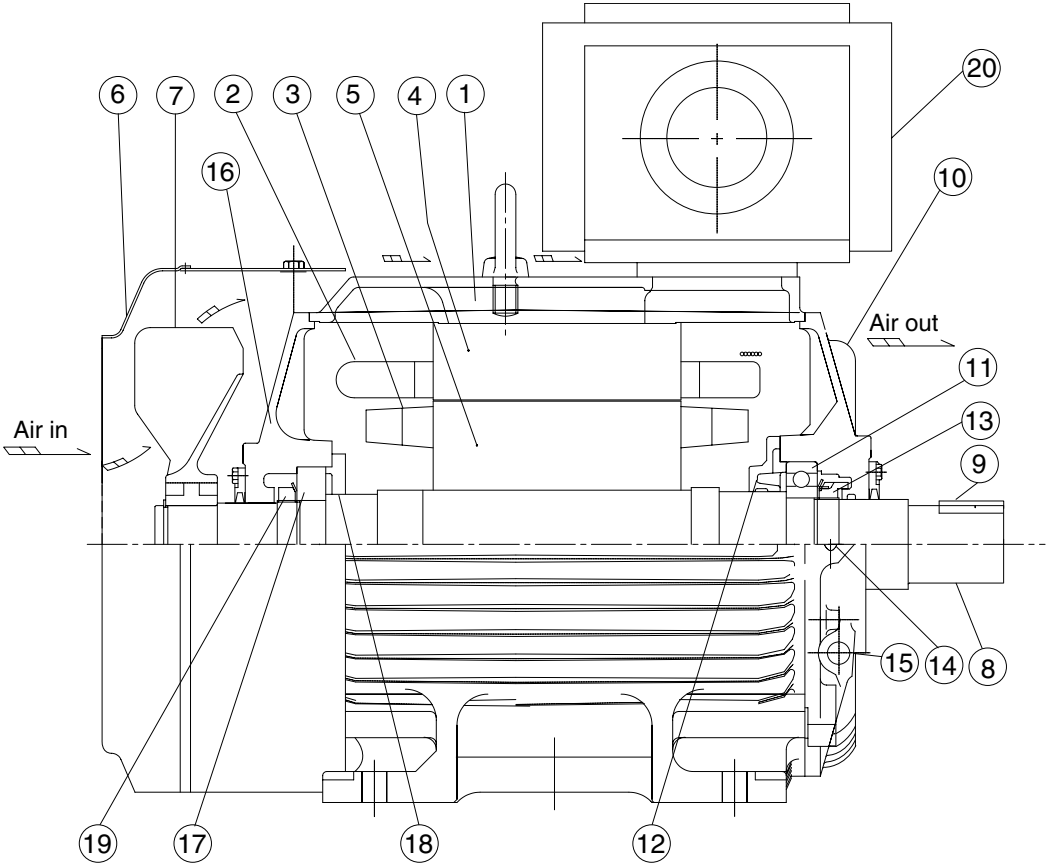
Section Drawing of Horizontal foot mount (Frame size 250S~280MD)
